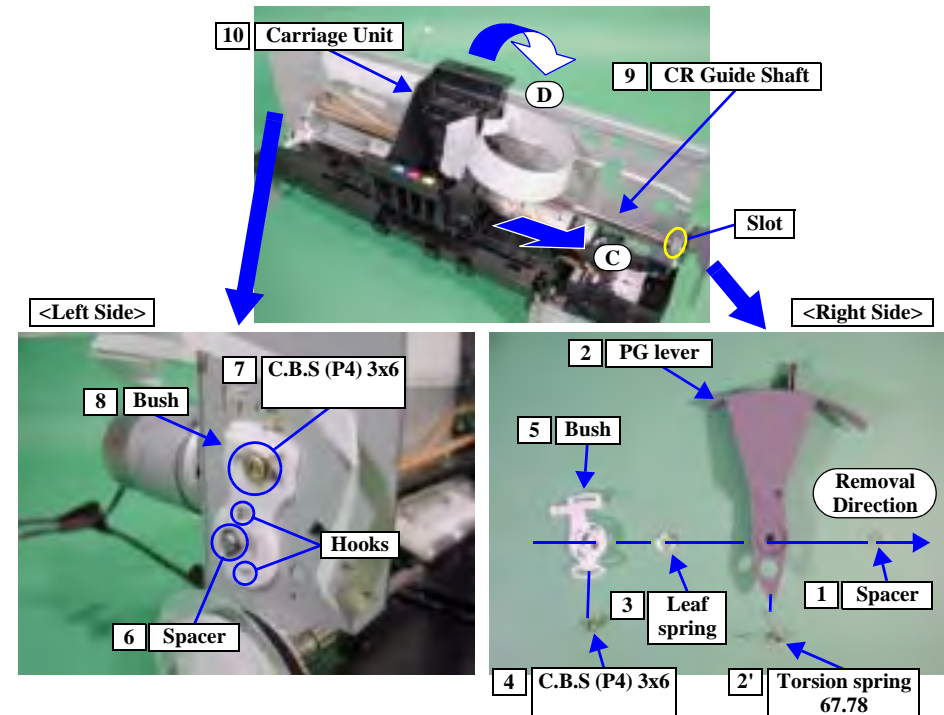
CR Guide Shaft/Carriage Unit Removal 2
